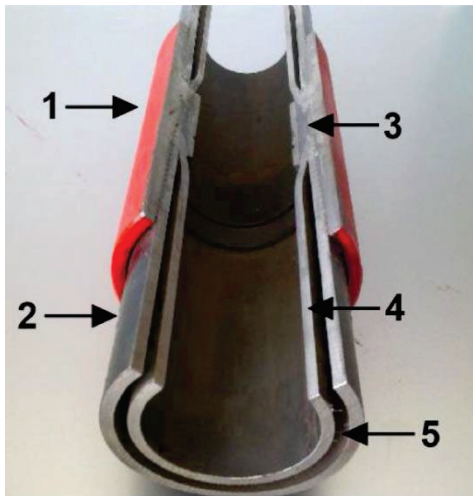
Components of vacuum insulating tubing. Reprinted with permission from Ref. [82], 2024, Elsevier. (1—coupling, 2—outer steel pipe (e.g., L80), 3—internal coupling insulator and weld, 4—inner steel pipe (e.g., 13CR85), 5—vacuum with getter material). Based on (Helix Oilfield Services Ltd., 2017, Aberdeen, UK).
